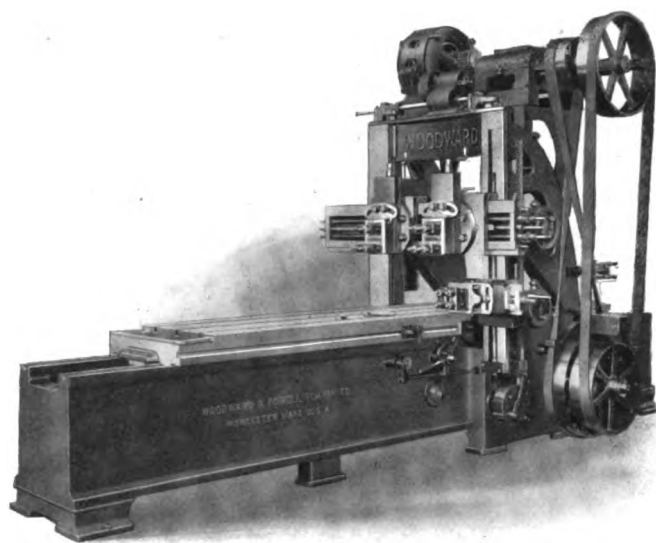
Heavy 30" x 30" x 10' Planer, with Four Speed Gear Box and Motor Drive
